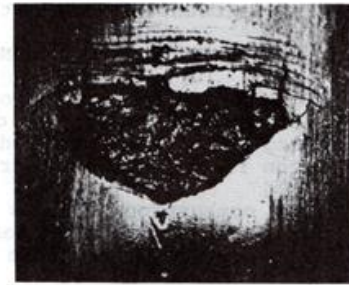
Large pitting failure on a ball bearing surface started from a small imprint under the lower damage edge
